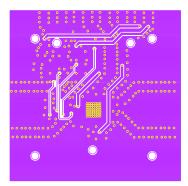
SKY65186-11 Evaluation Board Assembly Drawing
